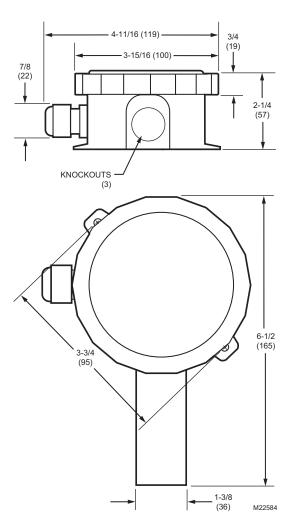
Outdoor-mount sensor dimensions in in. (mm).
